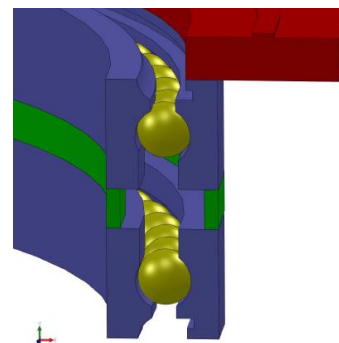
Magnified section of the angular-contact ball bearings and the spacers separating the rings
